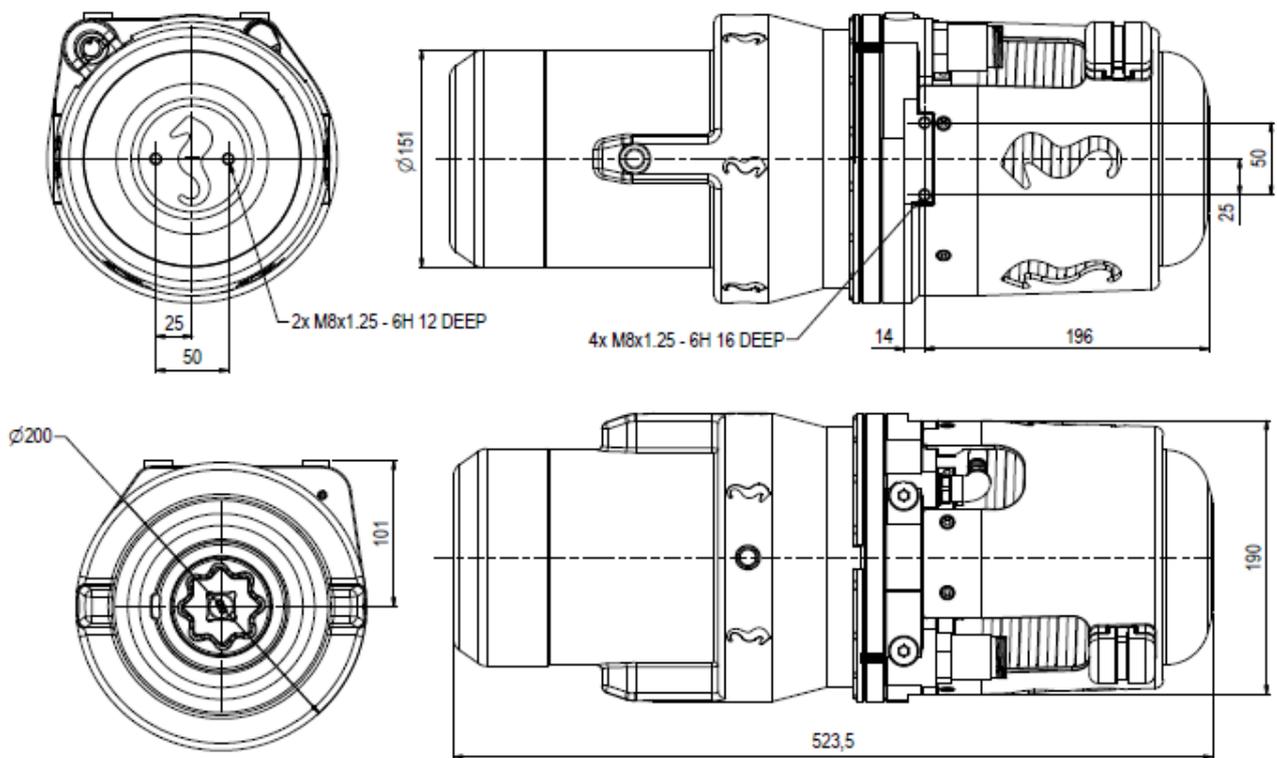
LWETT AUV configuration - main dimensions and bolting interface
